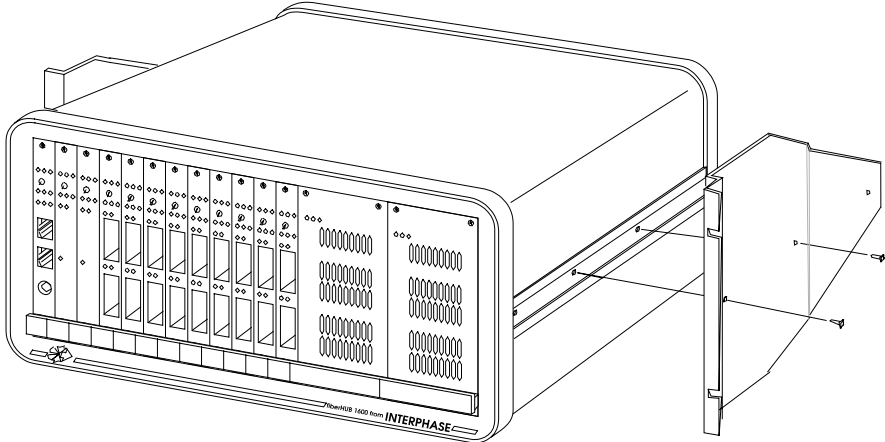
Positioning the Bracket for a Protruding Concentrator
